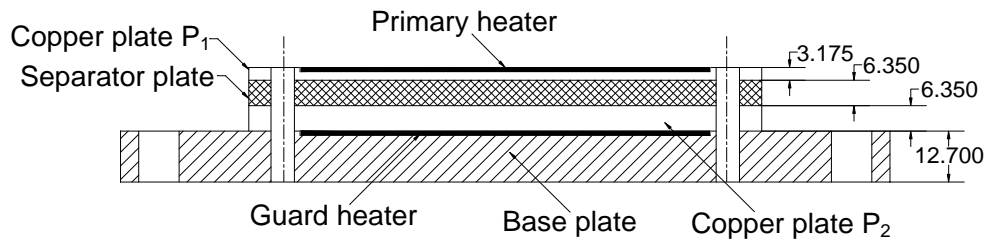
Separator plate assembly. Dimensions are in mm. Figure from [32].
